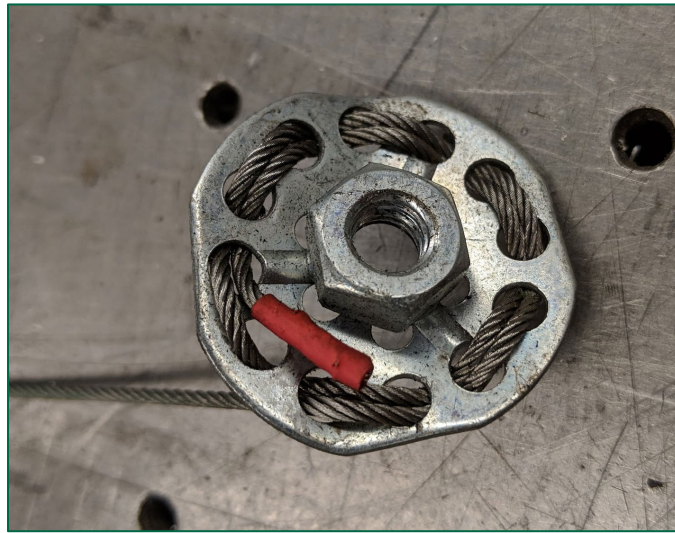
PDLS wire friction attachment method, using epoxy nut.
